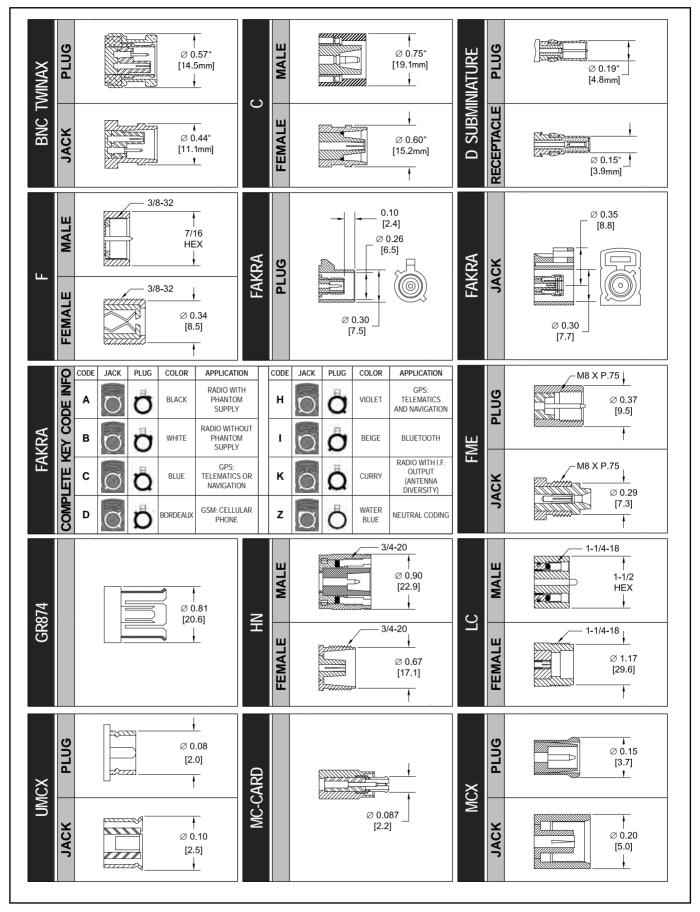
B - Connector side views, set 2 of 4. (Courtesy of Pasternak)
